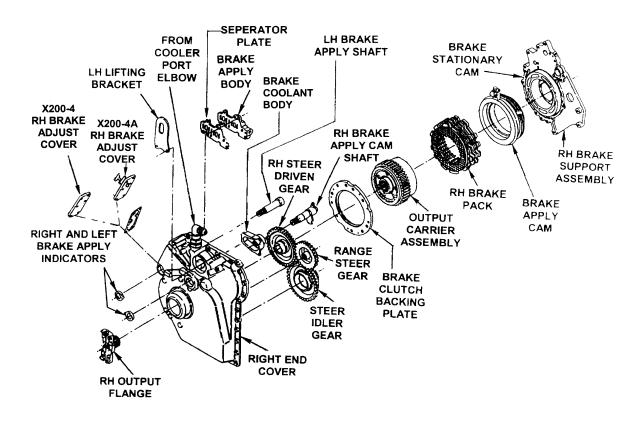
Exploded View of Major Components Right End Cover Assembly.
